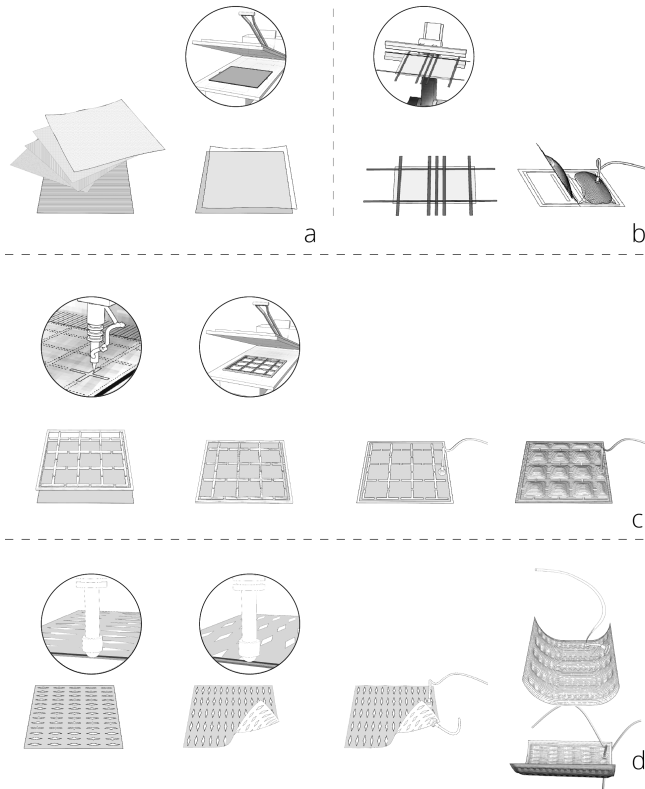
Coating the materials with TPU (a) enables three fabrication methods: (b) Manual sealing; (c) Heat press sealing; (d) Robotic sealing. (The circle indicates the equipments that was used for the particular method).
